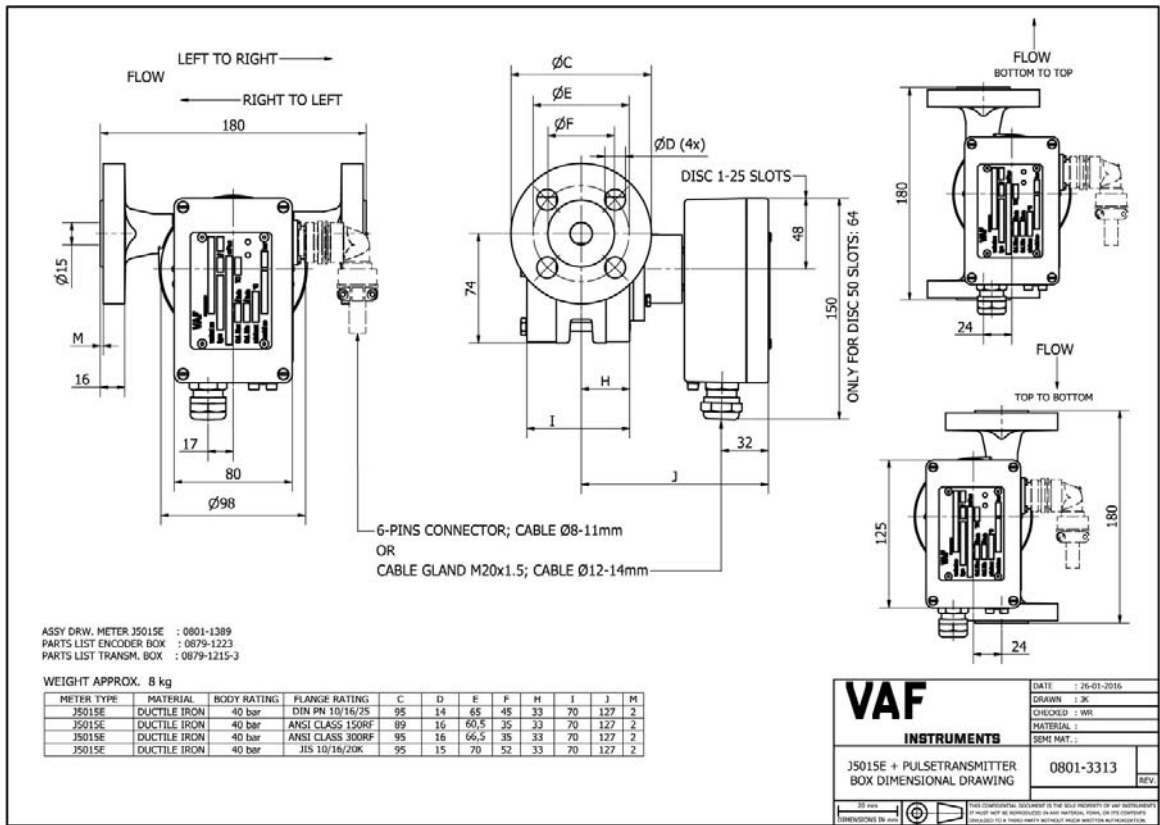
Drawing 0801-3313 – Dimensional drawing J5015E Pulse transmitter box
